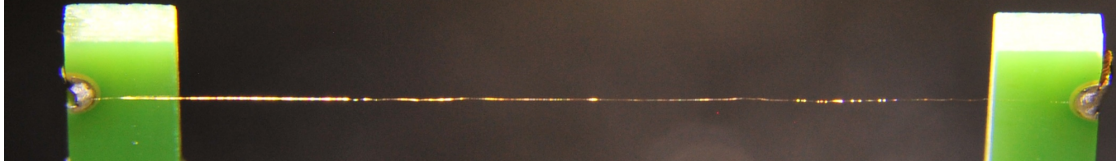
Closeup of the wire soldered to Version 2 of the wire detector board. There is about 2.5 mm of overlap of the wire with the PCB on either side.
